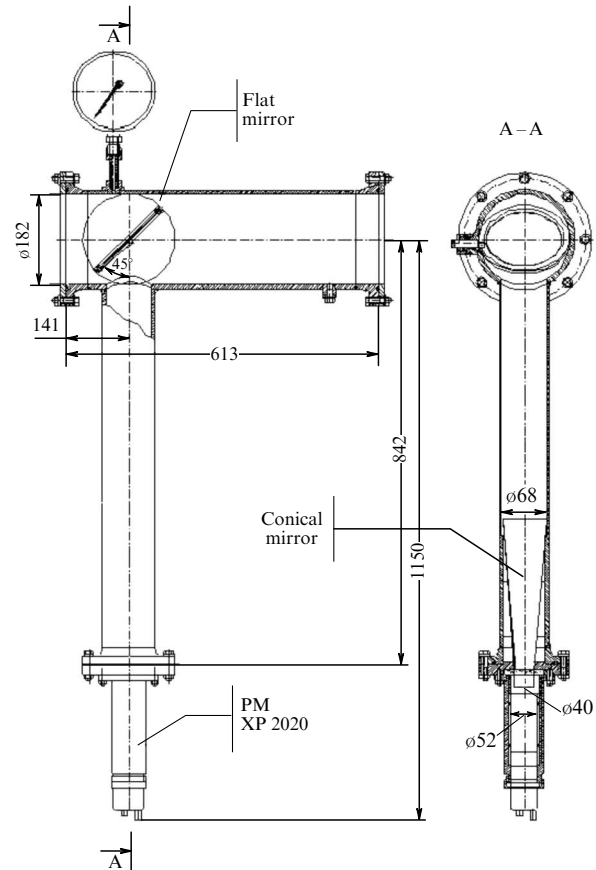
Arrangement of a threshold counter [1]. Dimensions are marked in millimeters.
